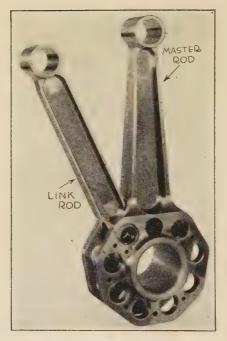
Wright "Whirlwind" crankshaft and connecting rod assembly.
